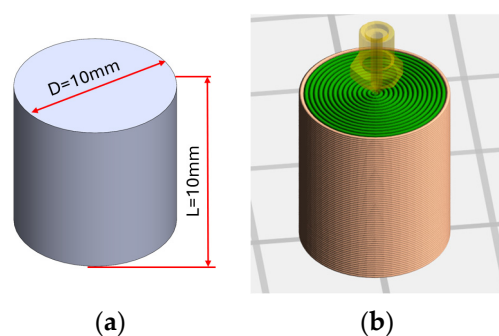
(a) geometry of 4D-printed sample and (b) 3D printing preview of slicing patterns.
